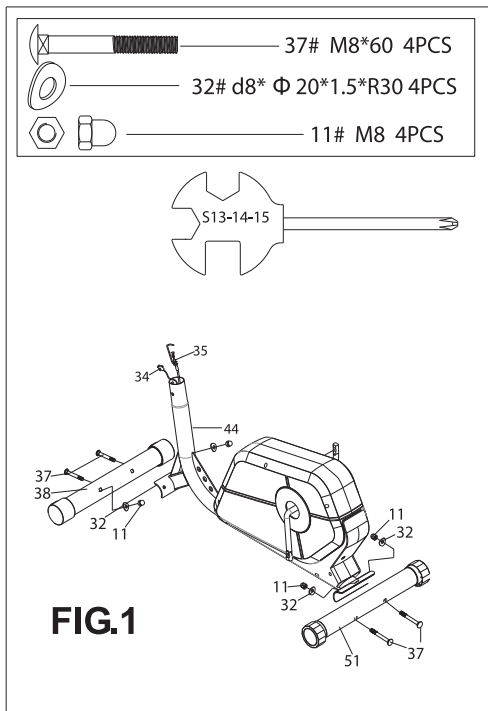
Attach the Front Stabilizer (38) and the Rear Stabilizer (51) to the Main Frame (44) with Carriage Bolts (37), Cap Nuts (11), and Arc Washers (32)
